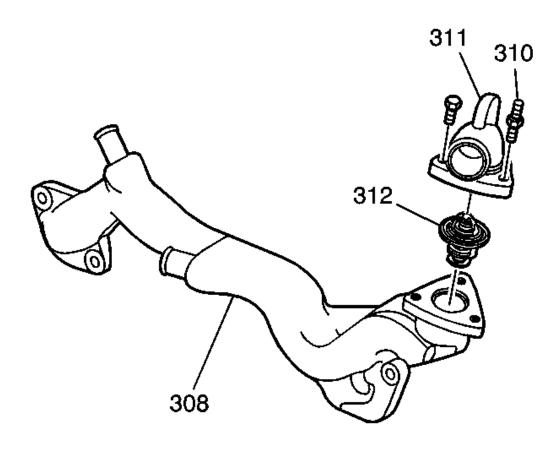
View Of Water Outlet, Bolts, Thermostat & Coolant Crossover Courtesy of GENERAL MOTORS CORP.
